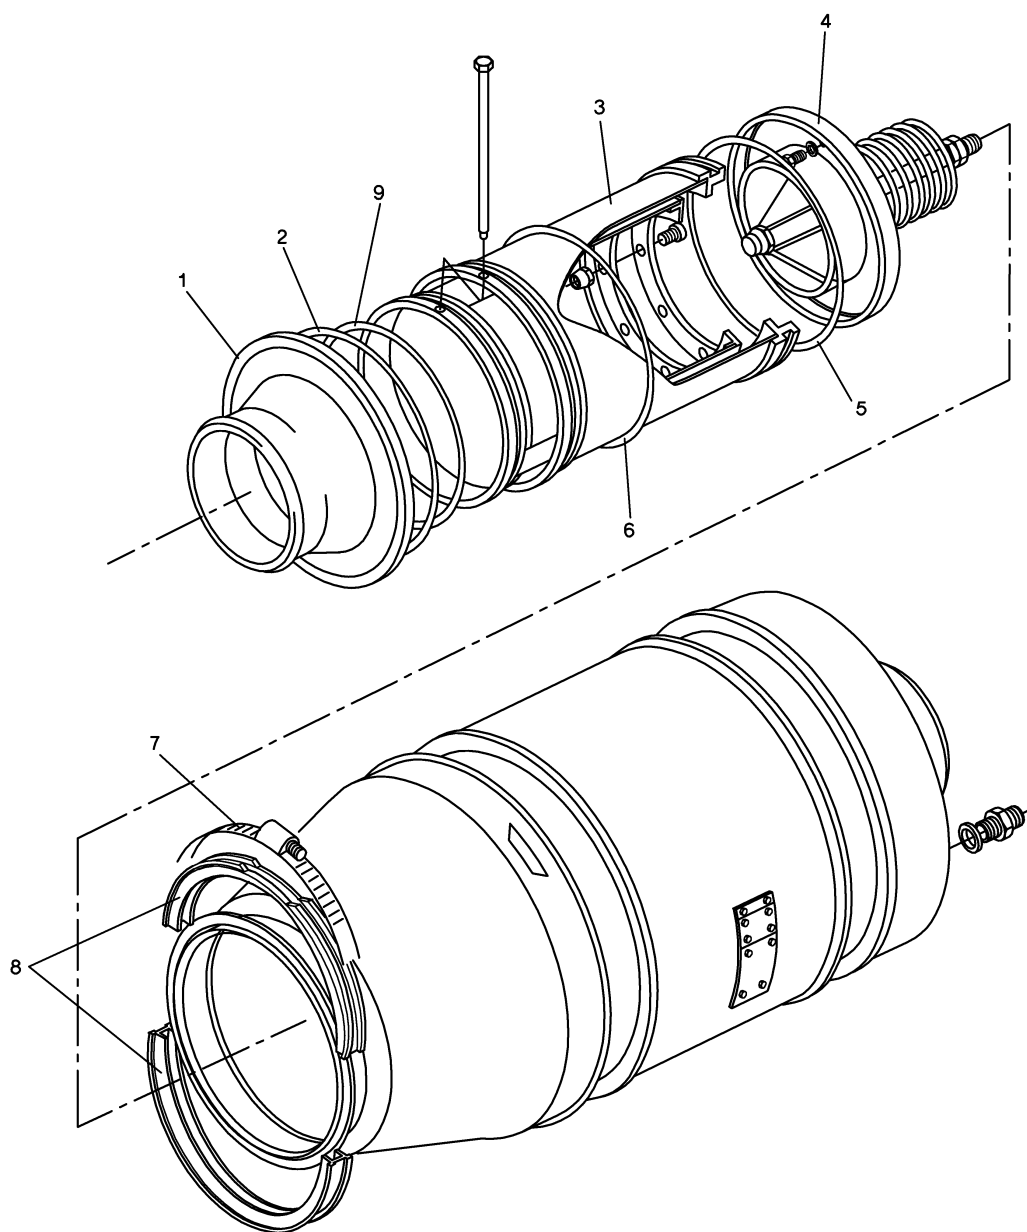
REMOVAL - INSPECTION - INSTALLATION OF COALESCER
